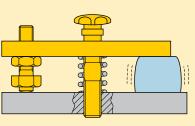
Simple mechanical fixture with larger workpiece deflection.
